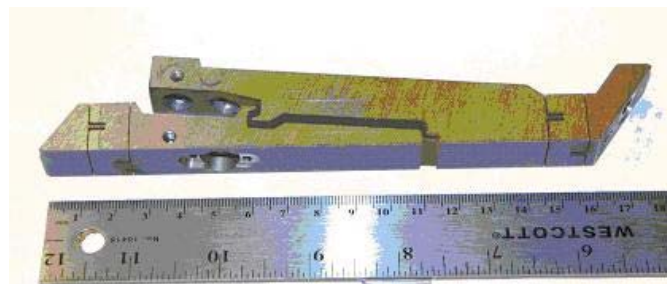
Side view of BPM strut without the linear motor, LVDT and springs.
